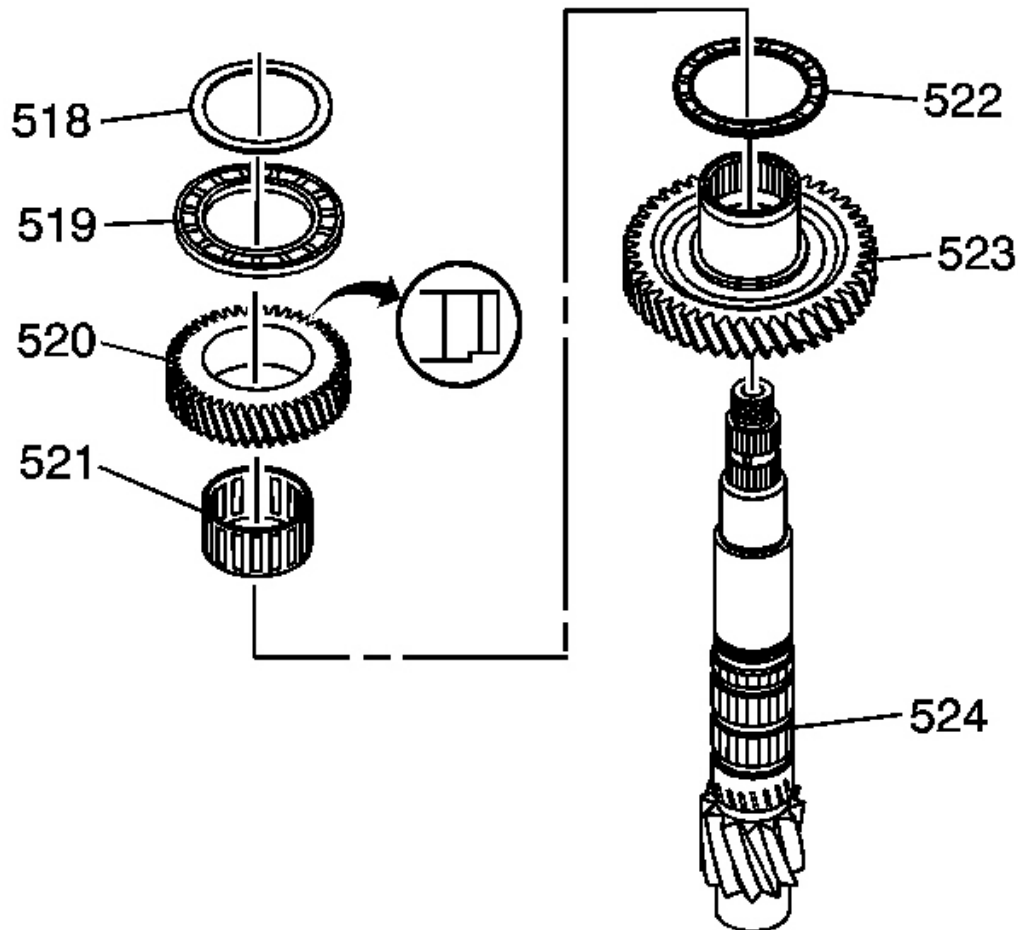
1st/2nd Driven Gear Output Shaft & Components Removed
